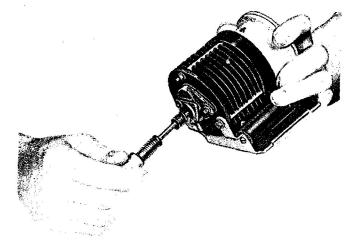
Removing Carbon Pile from Regulator Assembly
